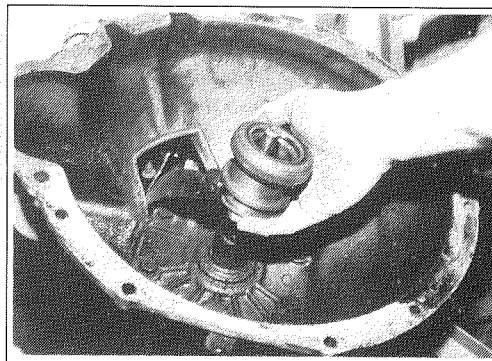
When all's done slide the carrier over the gearbox input shaft and clip the operating arm in place. Refit the gearbox to the engine.
